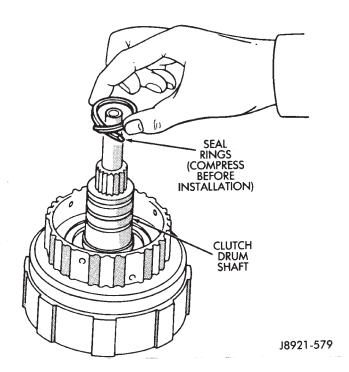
Installing Clutch Drum Shaft Seal Rings
